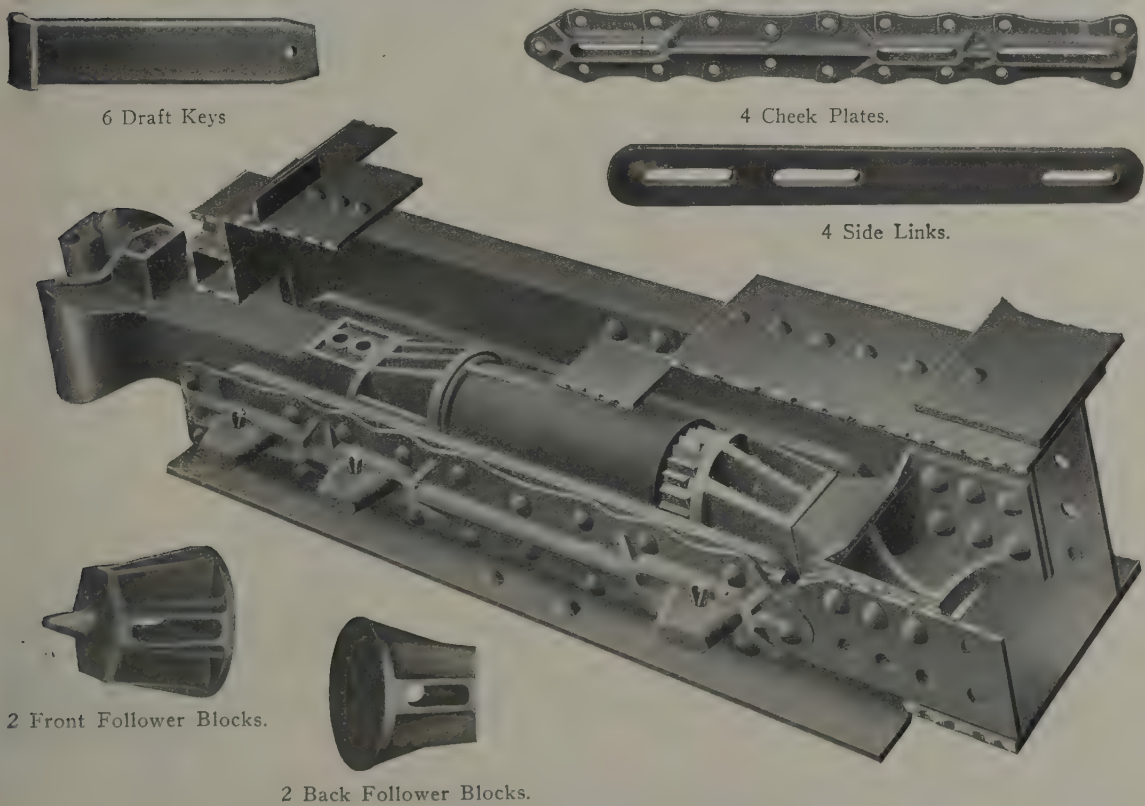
Farlow Three-Key Draft Attachments for Use with Westinghouse or Any Other Type of Friction Draft Gear, and Parts for One Car.
